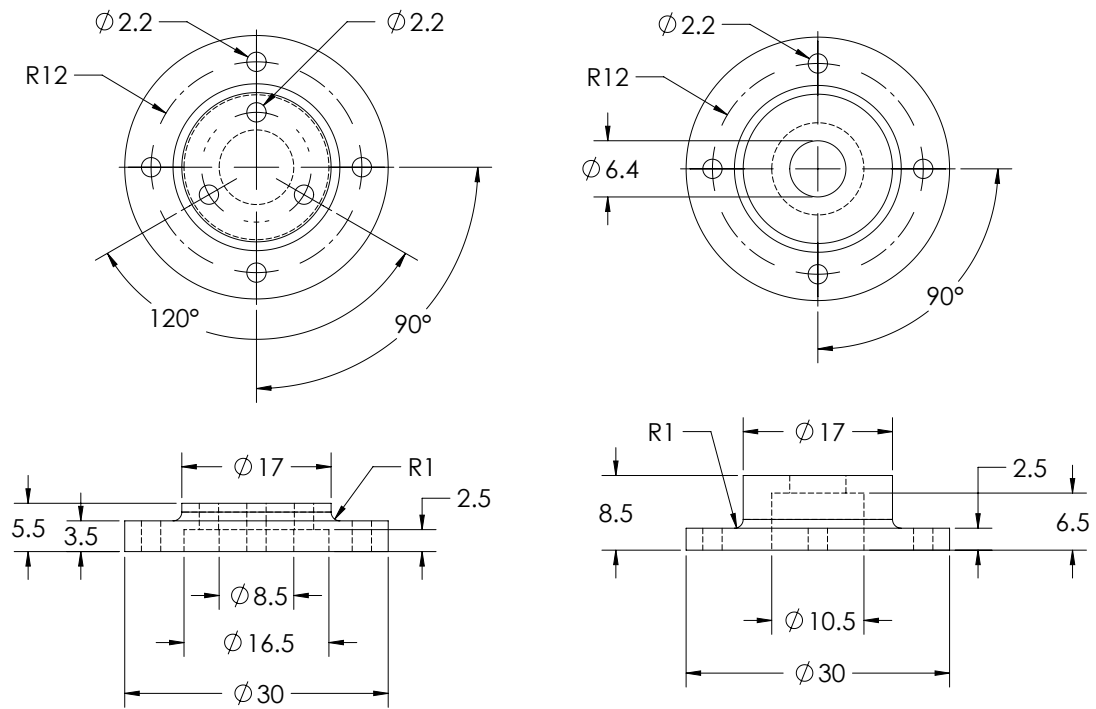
Mounting plates used to connect the Nano17 force/torque sensor to a Thorlabs mounting post. (left) Front mounting plate. (right) Back mounting plate.
